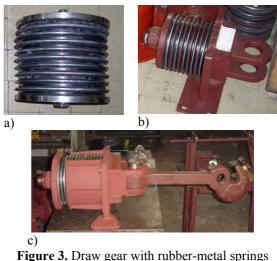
Draw gear with rubber-metal springsa) A rubber-metal spring; b) A draw gear;c) A draw gear with a draw-bar
